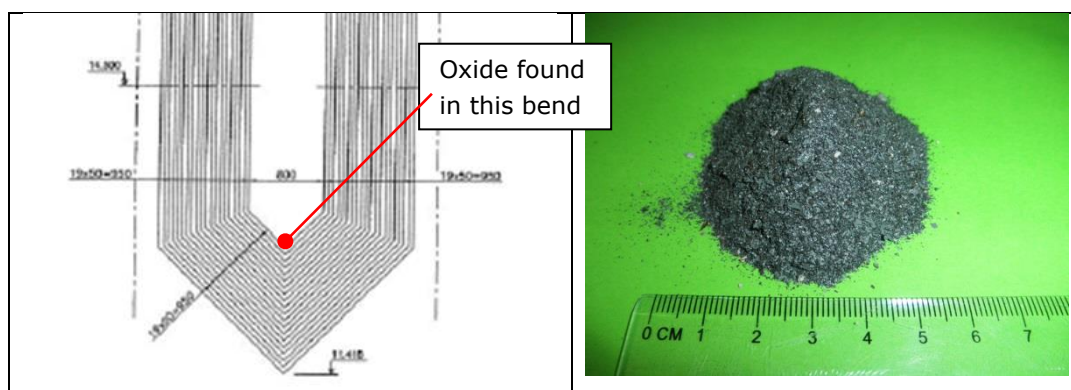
Boiler schematic showing bend and deposit (33g) removed from one bend where there had been a failure
